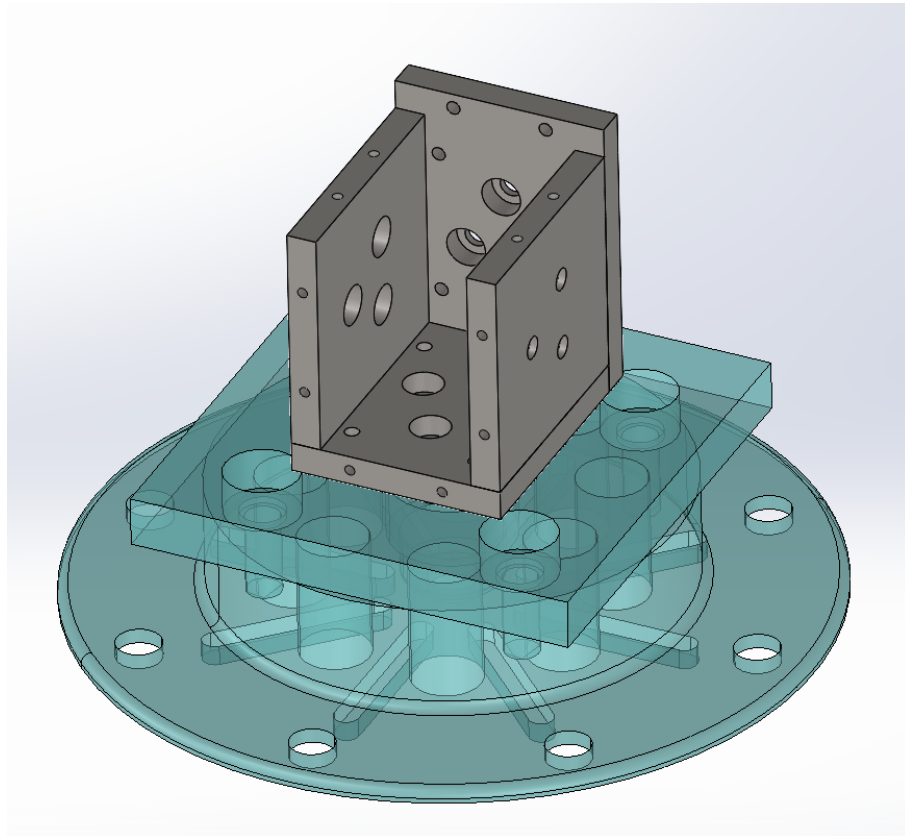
Vibration jig mounted in Z-axis with one 09.10-P01-SUTS and 09.12-P01-SUTS plates missing
